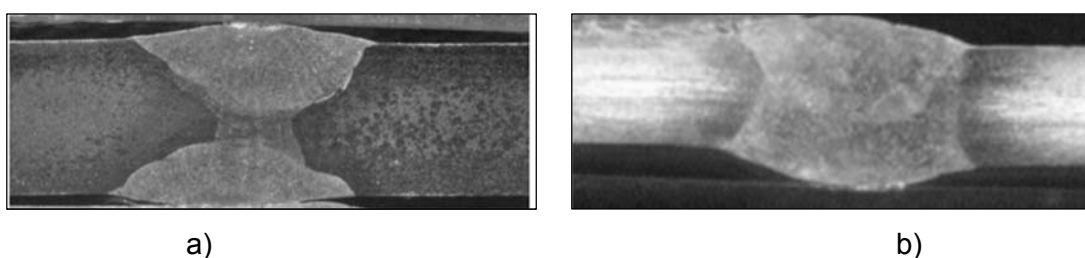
Macrostructure of welded joints of both samples a) sample 1, b) sample 2
